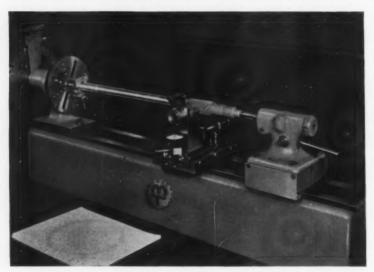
Heart of the new Michigan tooth-space error-checking system is this checker Model 1132 in which the toothed part is positively indexed
